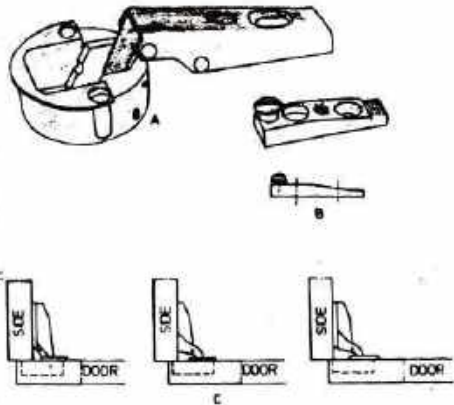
(A) 2D HINGE (B) ADJUSTABLE PLATE
